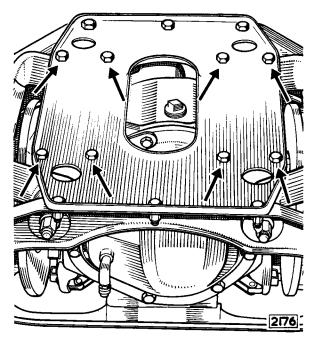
Showing the eight bolts which secure the tie plate to the inner fulcrum mounting bracket
